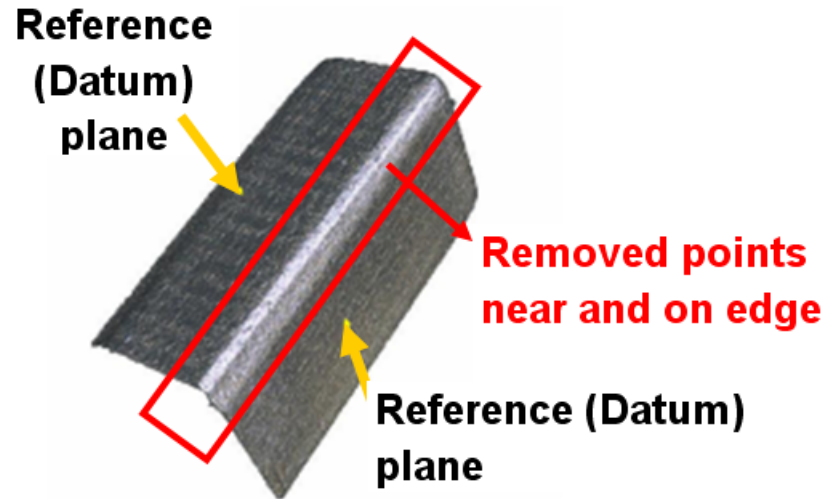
Points which have to be removed before perpendicularity measurement is carried out.
